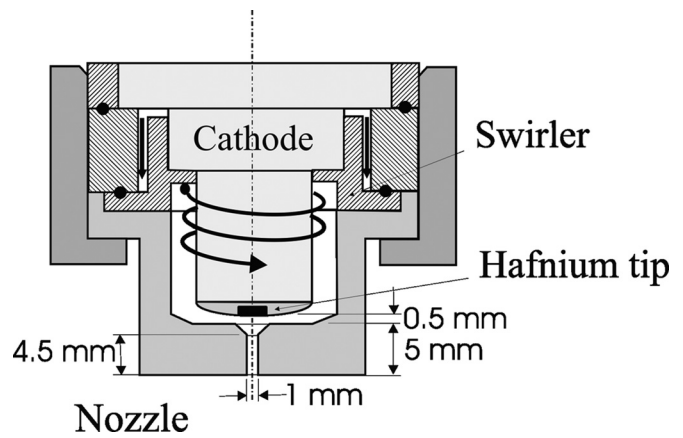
Schematic of the arc torch indicating several geometric dimensions.
